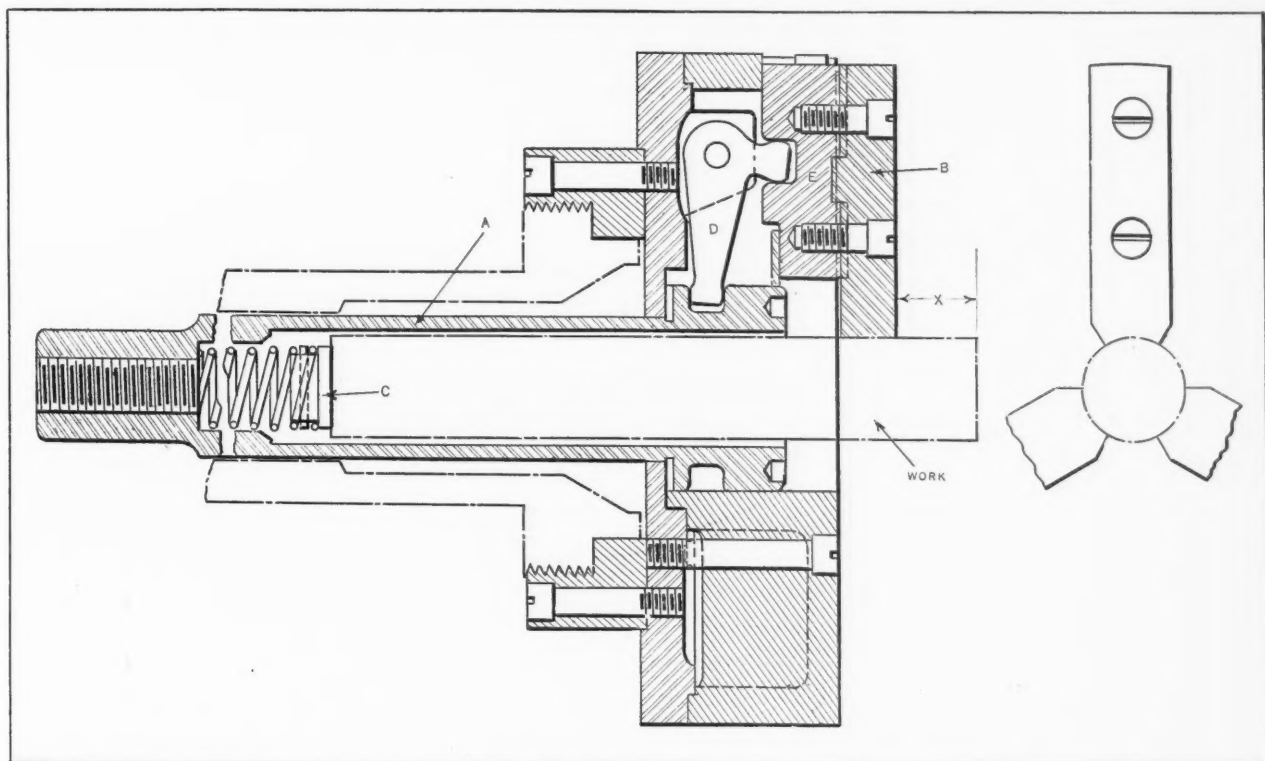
Chuck Designed for Holding Bar Stock in a Turret Lathe
